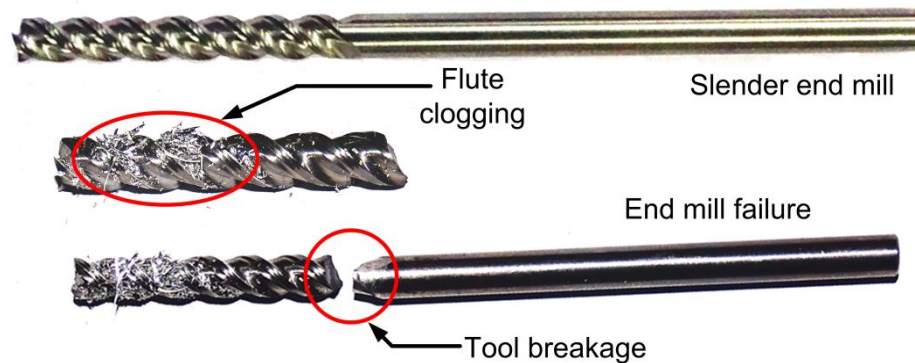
Tool flute clogging with chips and tool failure due to breakage
